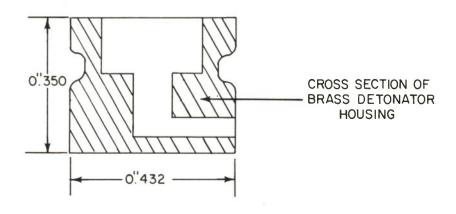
FINAL TERMINATING DETONATOR DESIGN
